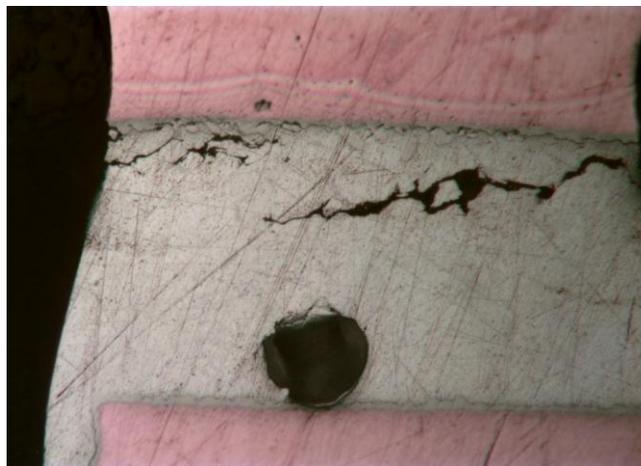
Cross Section Images after 3000 Cycles for QFN88_ Pre-tinned Component. Cracks were seen at the component side and through the solder joint.
